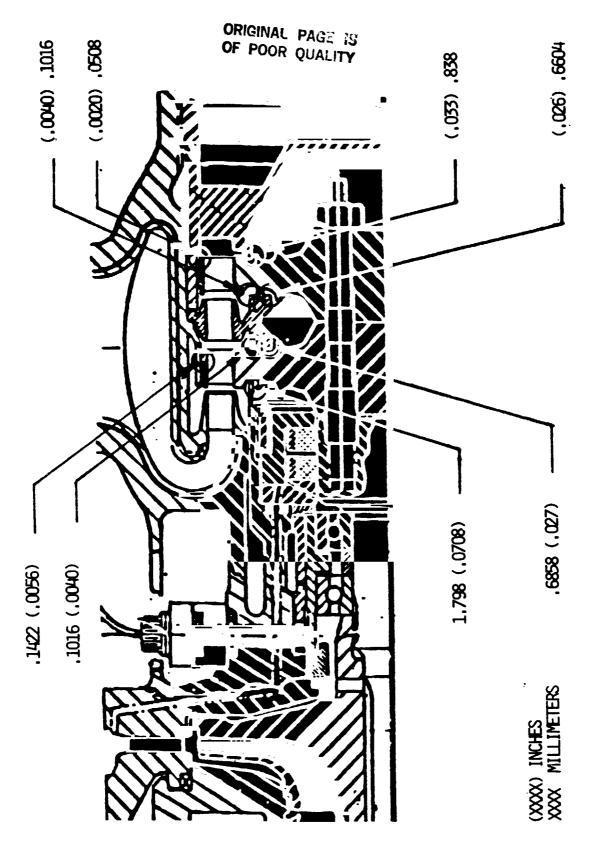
Mark 48-F Turbine Seal Diametral Clearances
